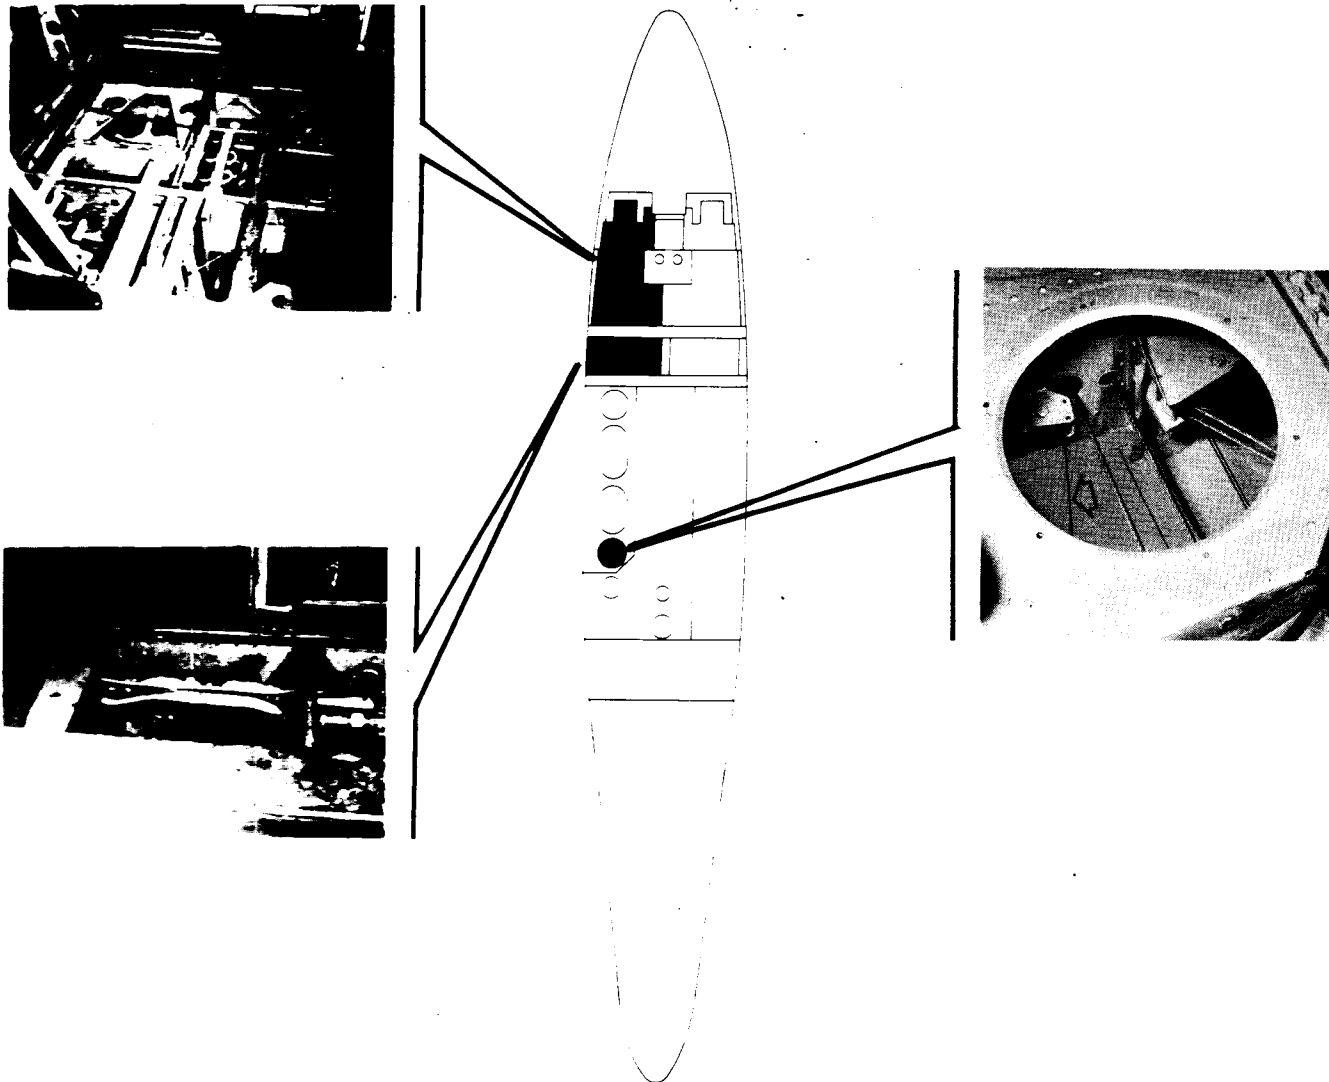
Elevator Tab Control Cables (Control Wheel to Turnbuckles)
